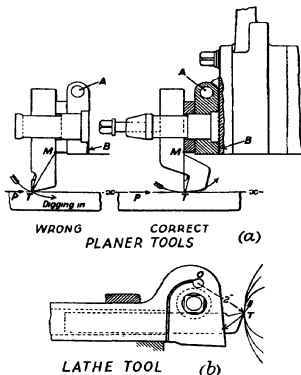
SPRING TOOLS FOR. (a) PLANER (b) LATHE
